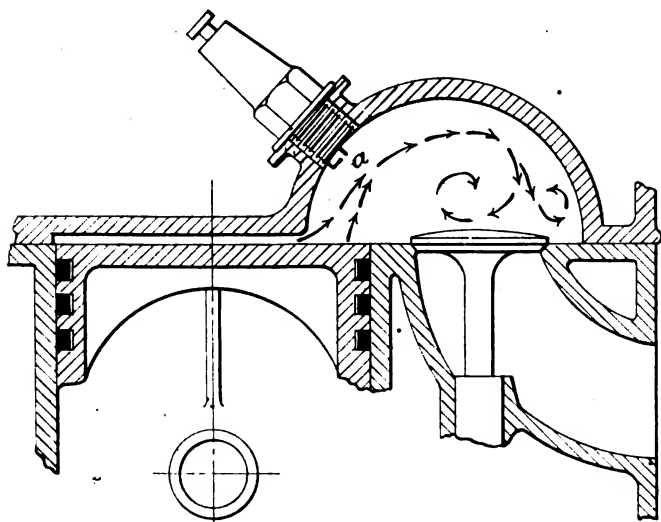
LOCATING THE SPARK-PLUG AT *a* WAS SUPPOSED TO GIVE THE MAXIMUM TURBULENCE IN A VALVE-IN-HEAD ENGINE
